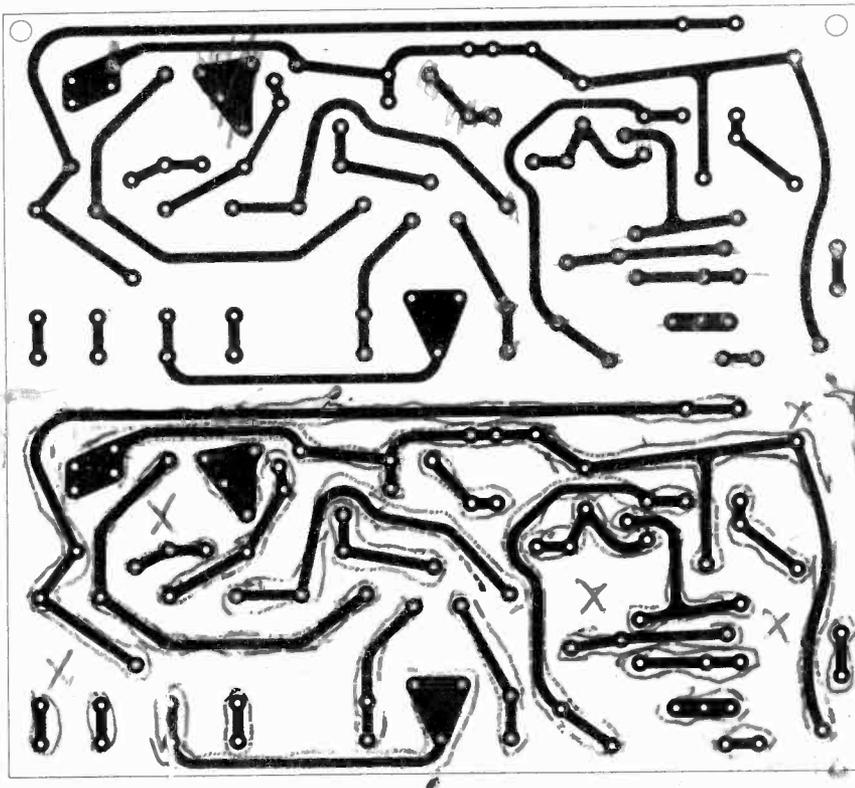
Actual size layout for the pre-amplifier printed circuit board
